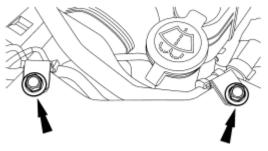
Locating A/C Tubes Nuts Courtesy of FORD MOTOR CO.
